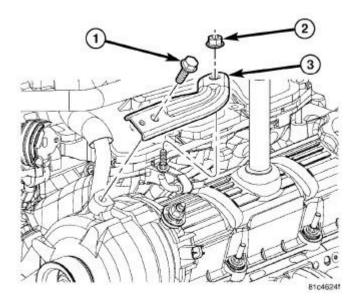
Removing/Installing Alternator Bracket Courtesy of CHRYSLER LLC
